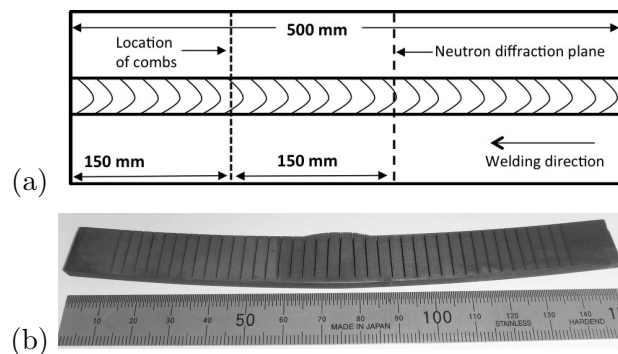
(a) Plan view of a welded plate showing the locations of the residual strain measurements and reference strain-free specimens. (b) Sectioned specimen used to determine the strain-free lattice parameter [28].
